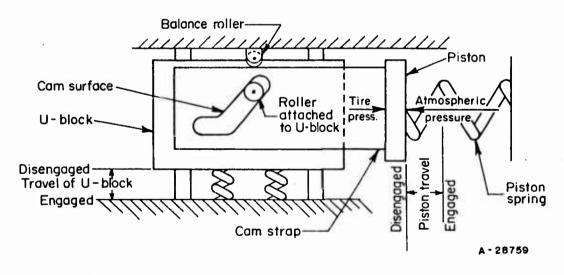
METHOD OF ENGAGING AND DISENGAGING SPACER BLOCK IN PRESSURE SENSOR
